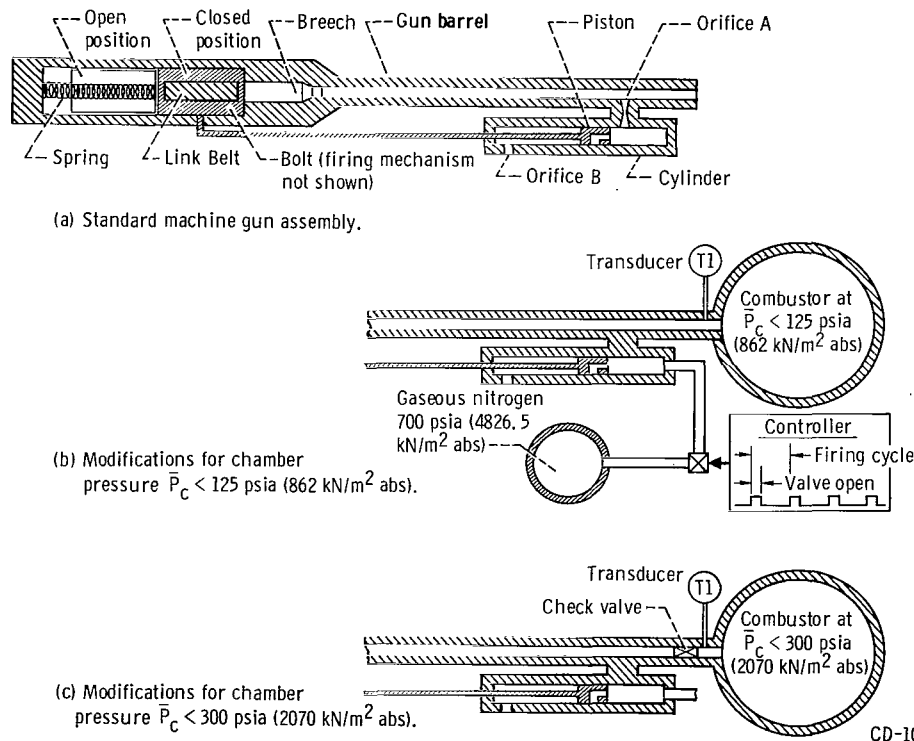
Standard machine gun assembly and modifications necessary for conversion to rating device.
